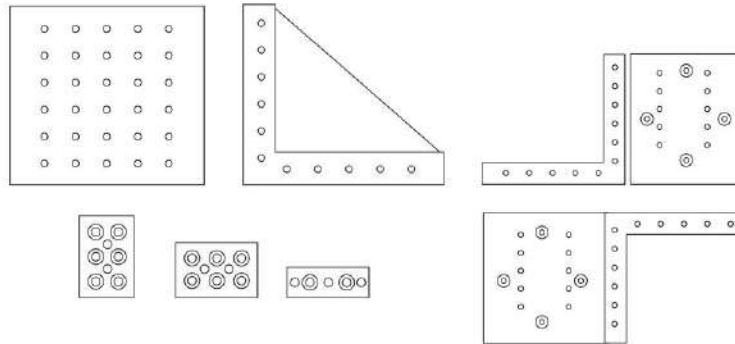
Modular fixture elements used for supporting complex workpieces
